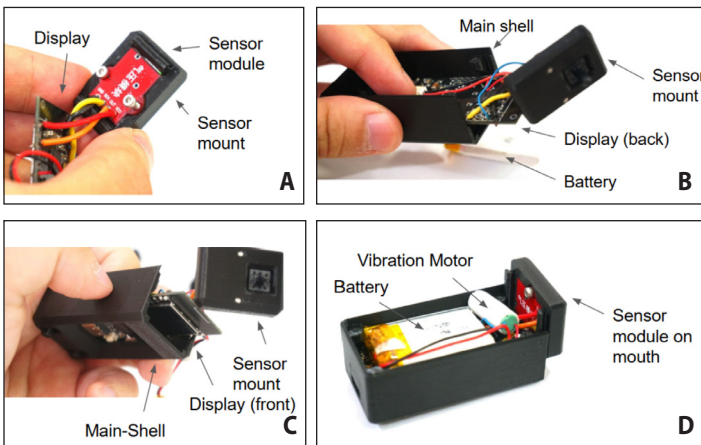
Mounting components: A. Mounting the sensor module on the sensor holder; B. Sensor module attached to the display on the main-shell (back view); C. Front view of the display; and D. Installation of the battery and vibration motor
